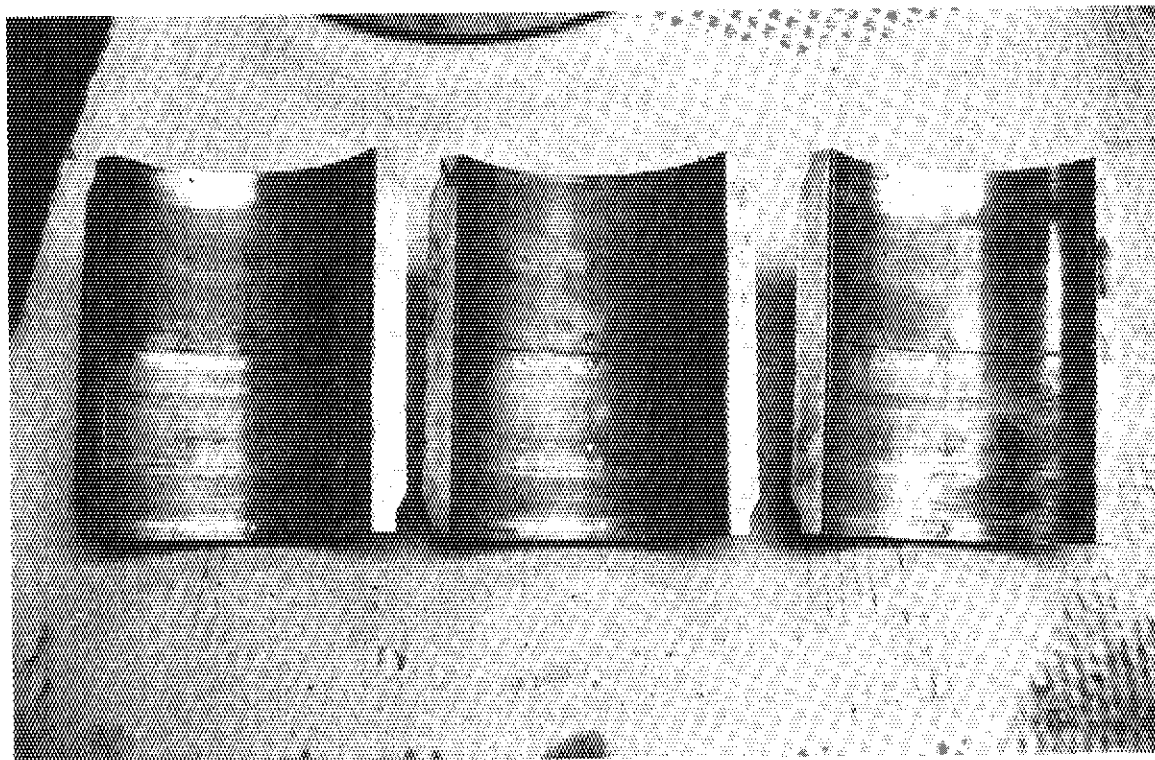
Scratched Lower Journal Bearing Pads of B₁
